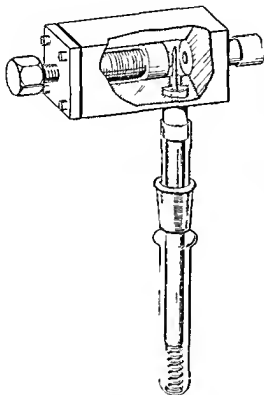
Metal Valve for Fracturing Glass Tubulations
